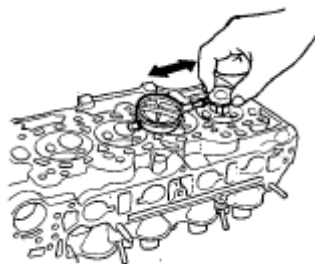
Inspecting Valve Stem-To-Guide Clearance
